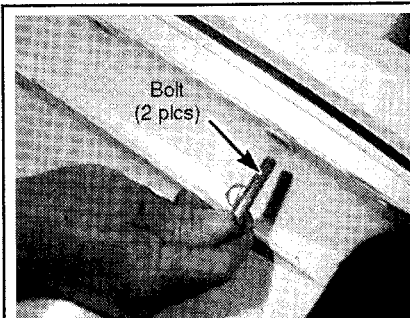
With the gearcase almost flush, thread and slowly tighten the bolts
